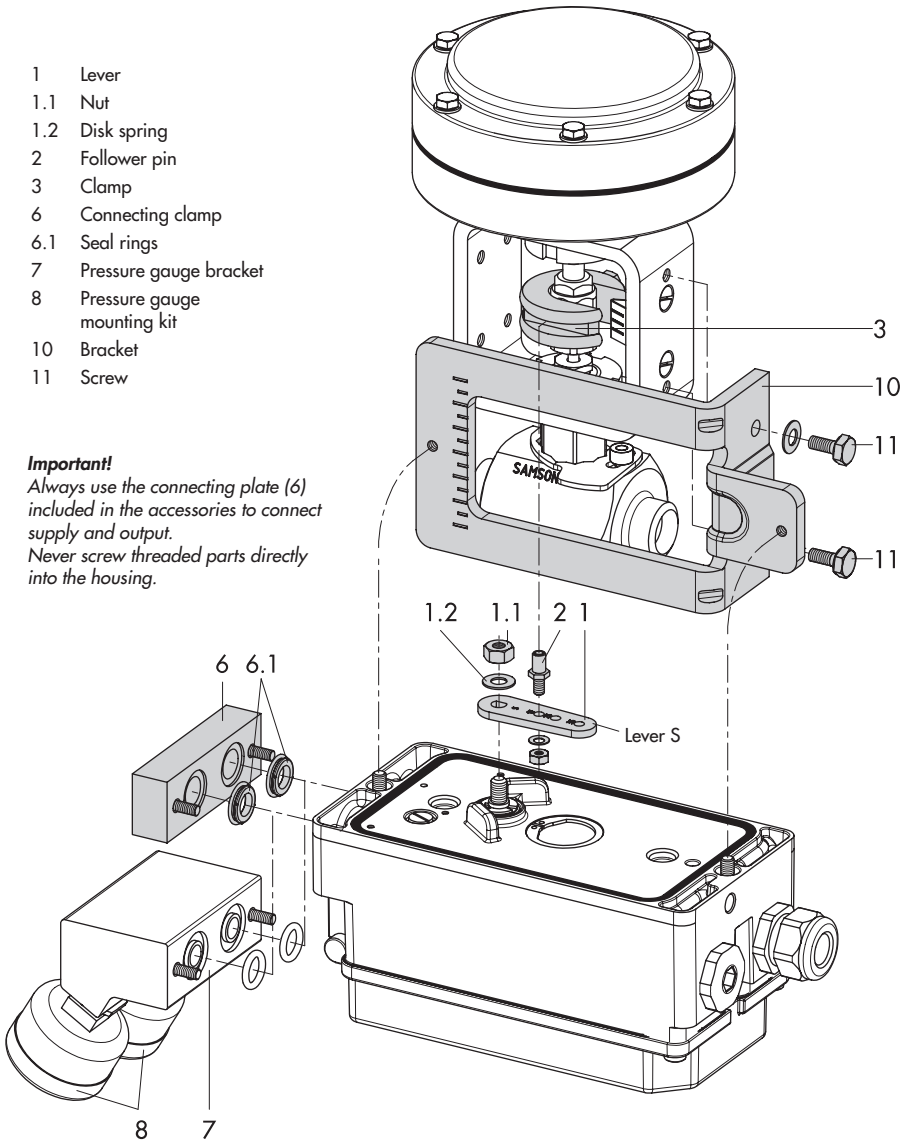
· Attachment to Type 3510 Micro-flow Valve
